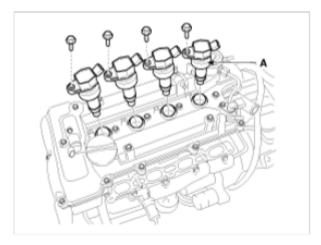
Identifying Ignition Coils Courtesy of HYUNDAI MOTOR AMERICA
